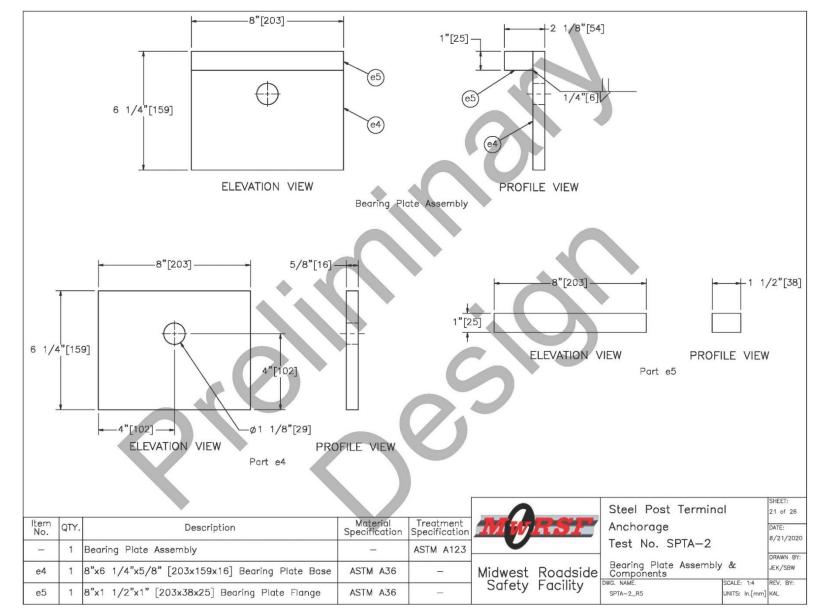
Bearing Plate Assembly and Components, Test No. SPTA-2
